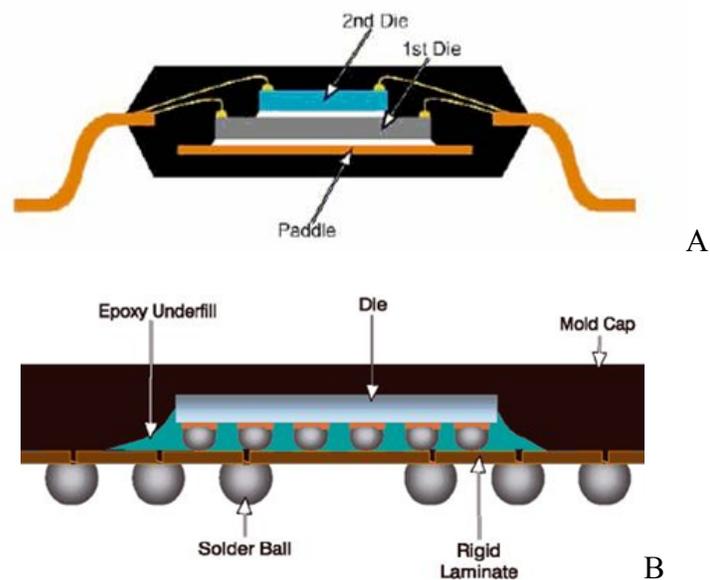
Type of die attachments. A) Wire bond package. B) Flip chip package.
